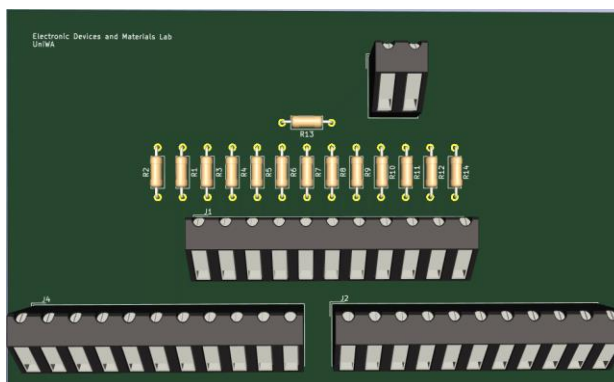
Resistor Bridge PCB Top View (KiCad 3D view)
